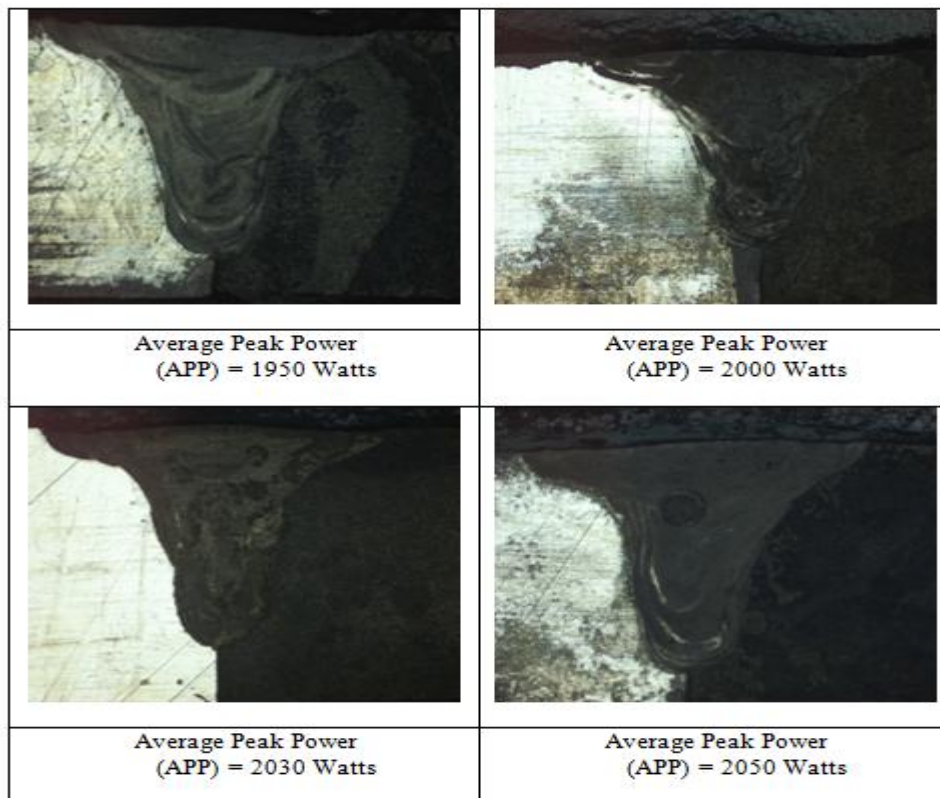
The penetration depth of butt joint of 316L stainless steel- steel plates without offset-ting the laser beam
